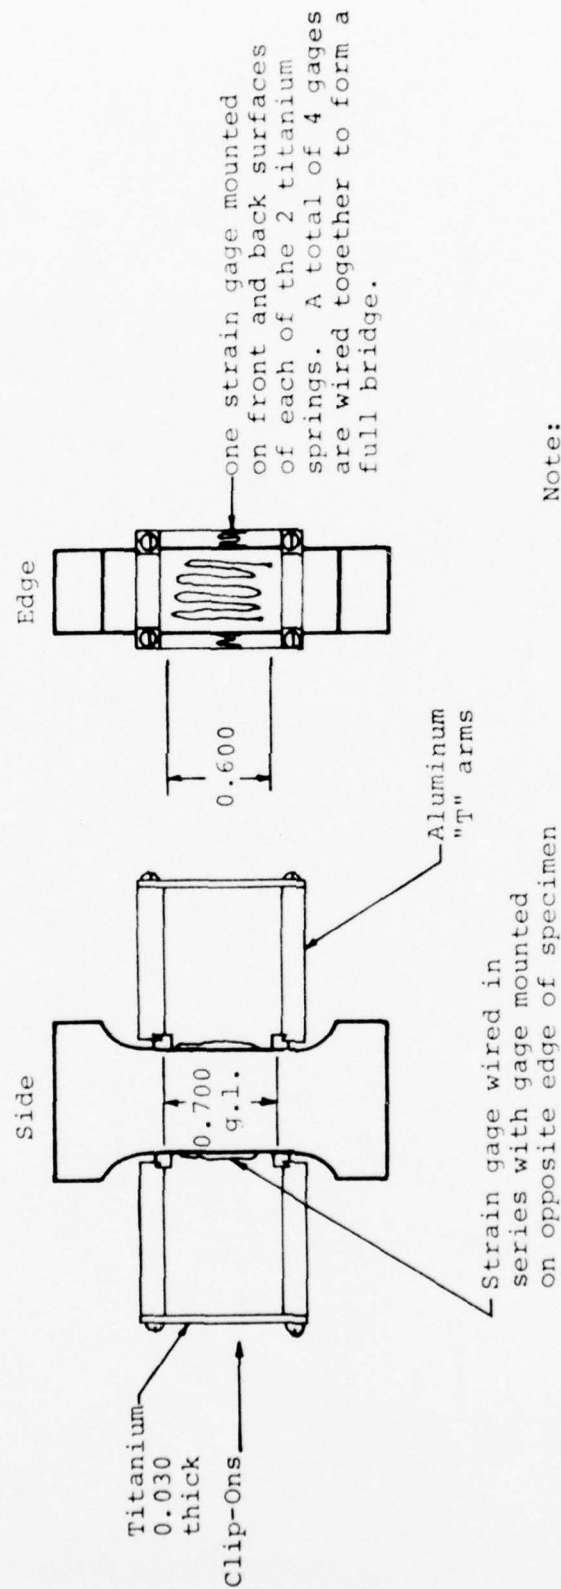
SoRI Design Axial Specimen - Clip-On and Strain Gage Configuration
